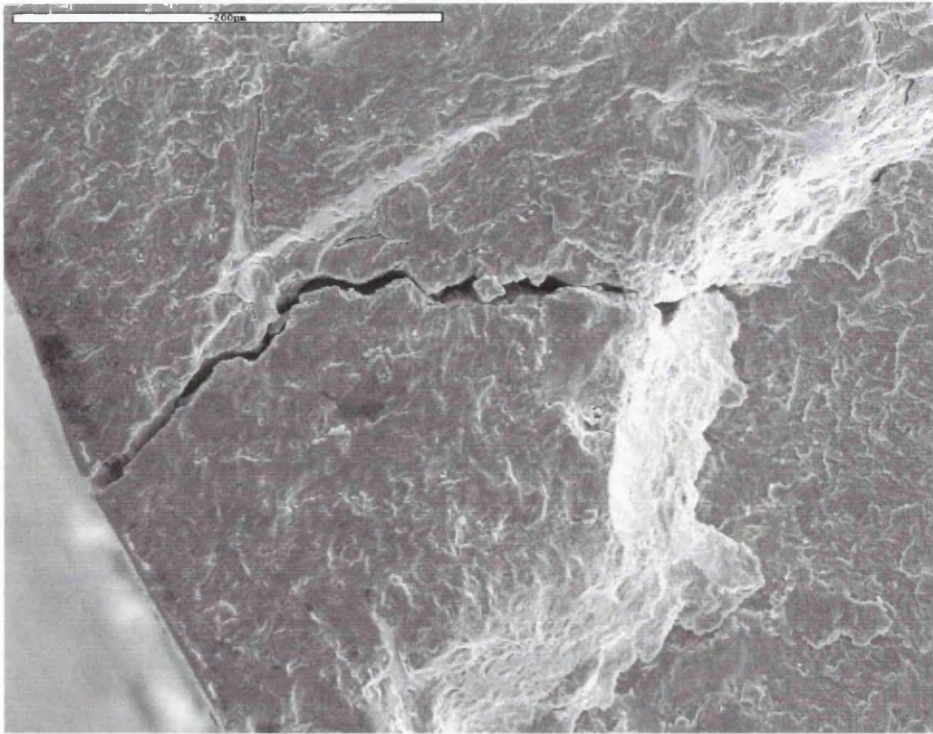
Strain control fracture surface (550°C, 2 min dwell in tension), with sub-surface cracking
